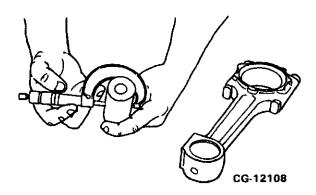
Measure Piston Pin O.D. to Check for Wear
